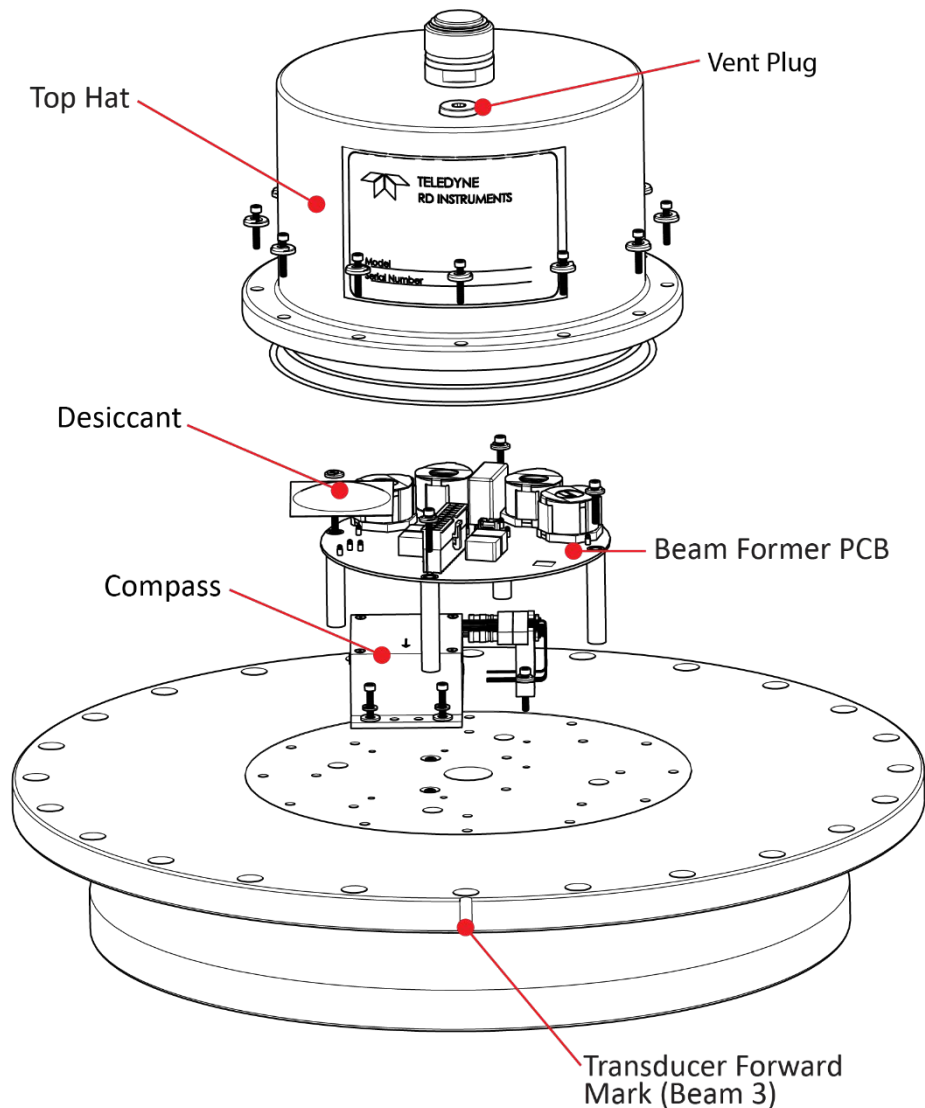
Transducer PCB Layout (75 kHz Transducer Shown)
